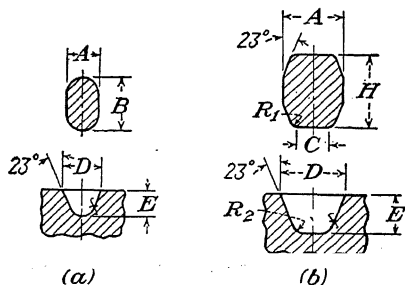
Ring and groove dimensions: (a) detail of ring-and-groove sections, oval-ring type; (b) octagonal-ring type.
